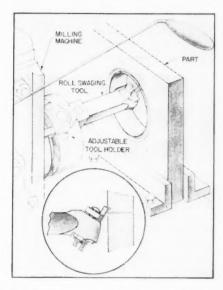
Illustration showing roll swaging set up on a horizontal milling machine.
